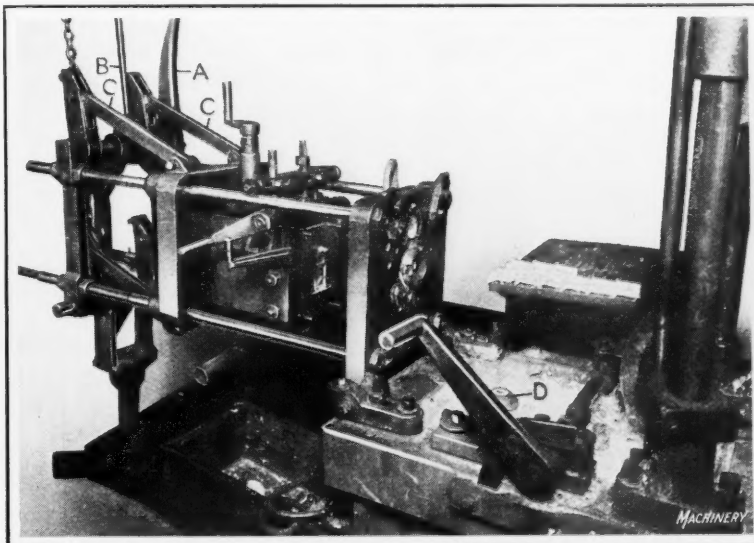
Plunger Type Die-casting Machine with Die Carriage hinged back, showing Melting Pot and Carriage Lock
